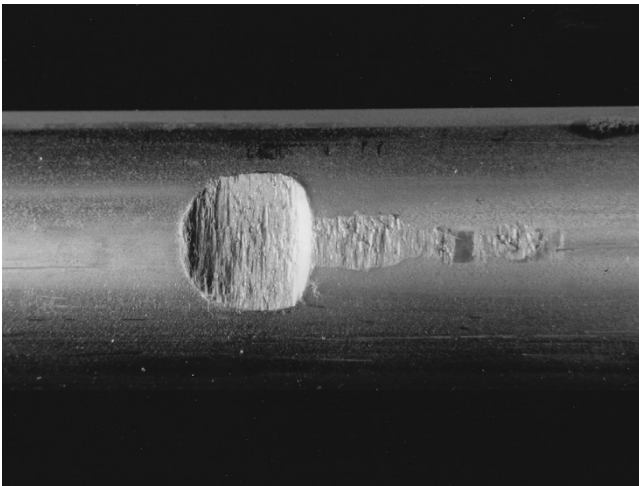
Fretting Wear of a Gas Heat Exchanger Tube at a Baffle Edge Location.
